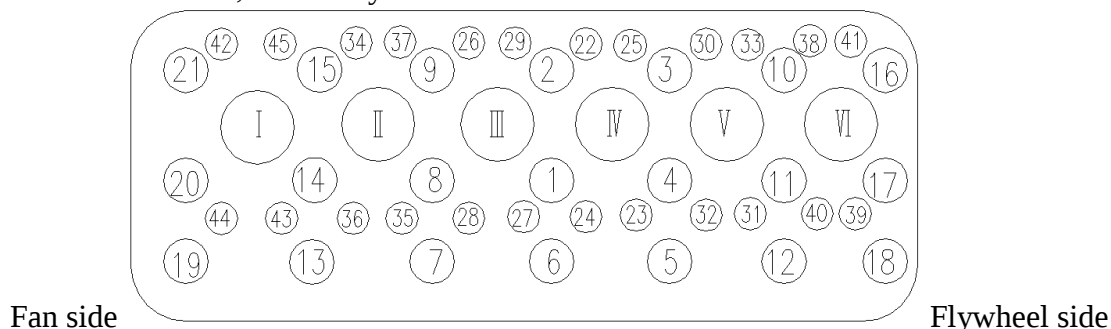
Tightening Sequence of Cylinder Head Bolt
